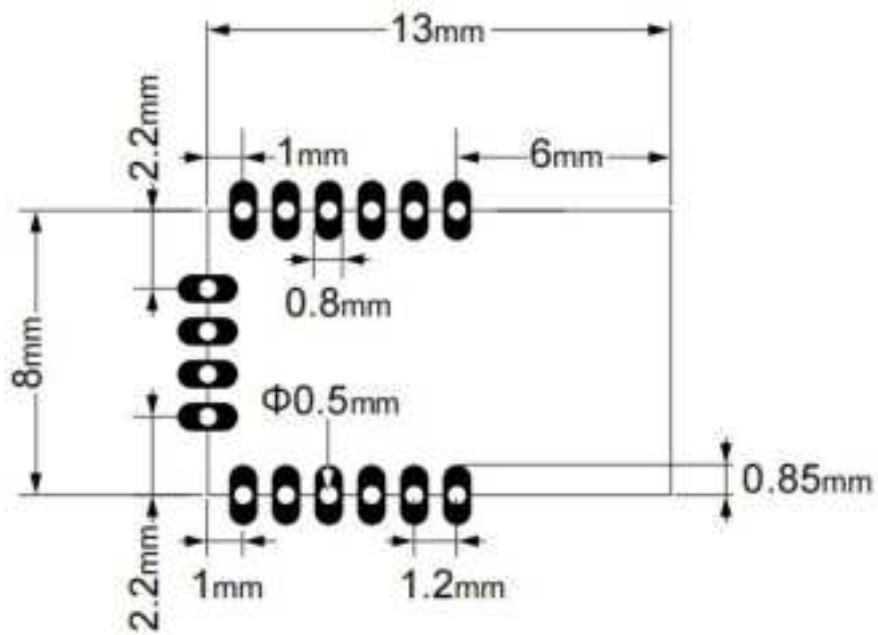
EH-MC25 Recommended PCB Land Pattern
